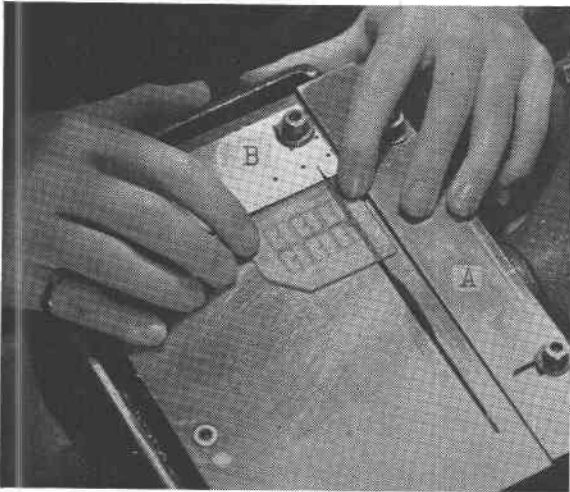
Trim saw table. (A) Adjustable side reference edge set to desired blank width from blade; (B) rear reference edge perpendicular to side reference edge and blade. First cut is being made on wafer after which it will be translated to side reference edge to cut strips of blanks.
